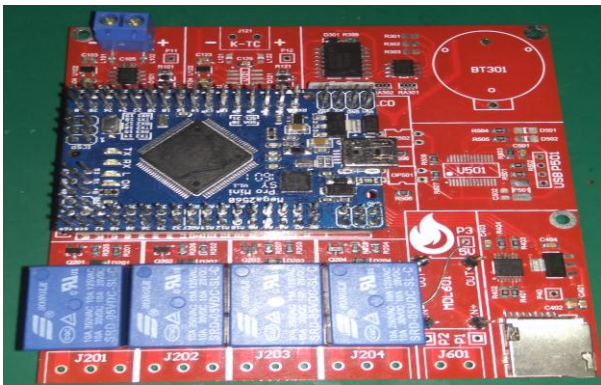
Latest version of the controller PCB manufactured by an external PCB service.
